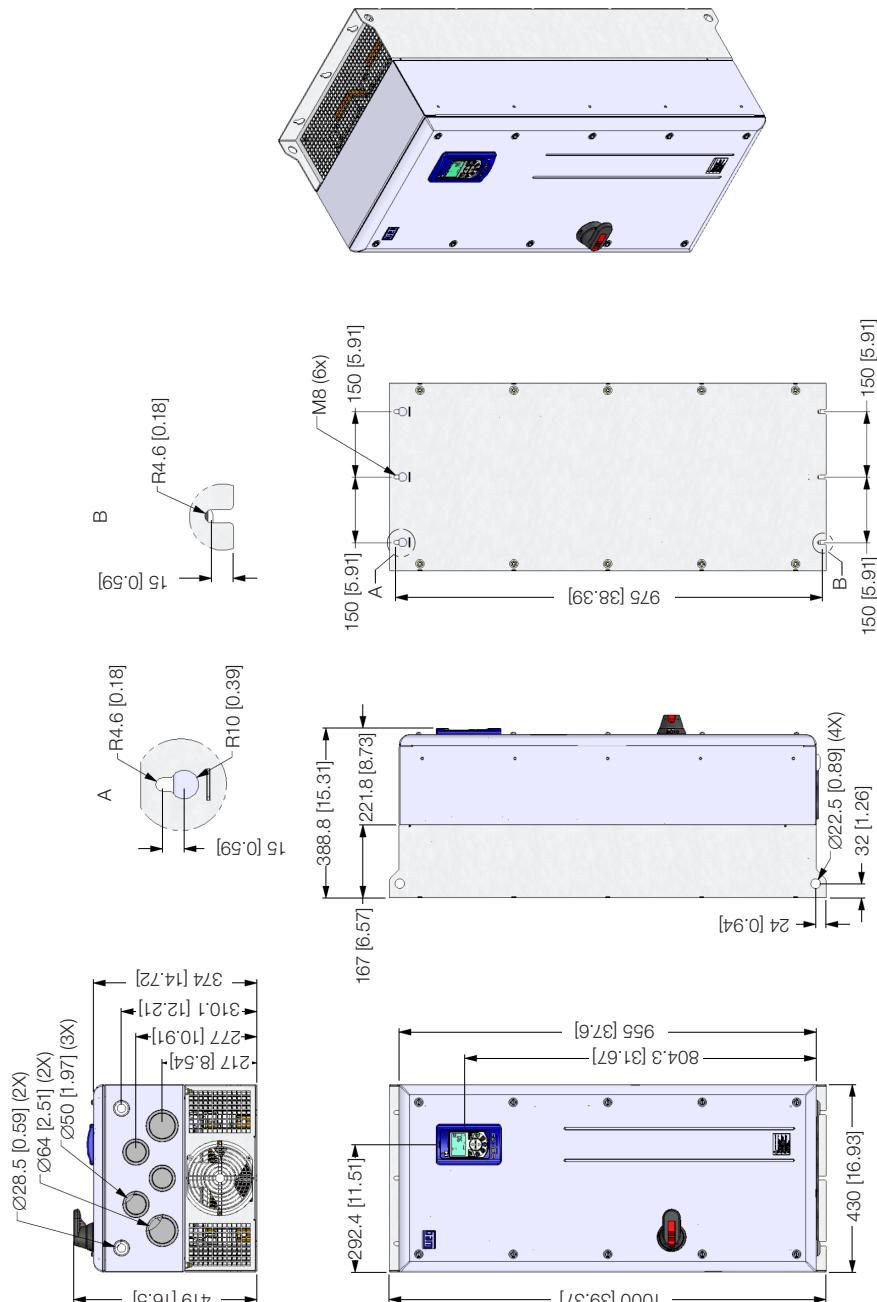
Inverter dimensions in mm [in] - frame size E with degree of protection IP55
